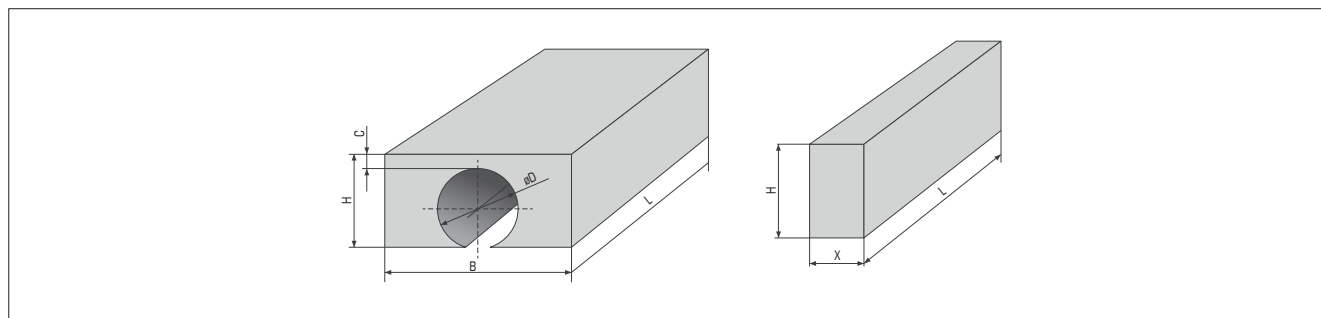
a) type “A” expansion pad b) type “B” expansion pad
